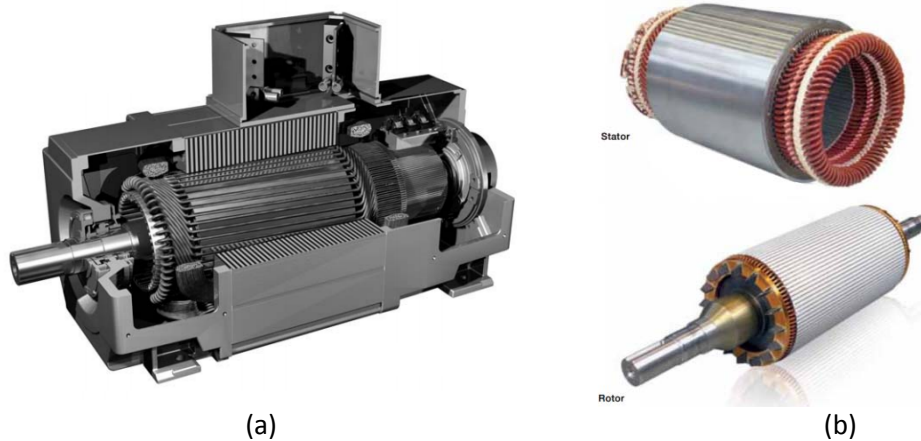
(a) ABB DC motor. (b) ABB induction motor stator and rotor.
